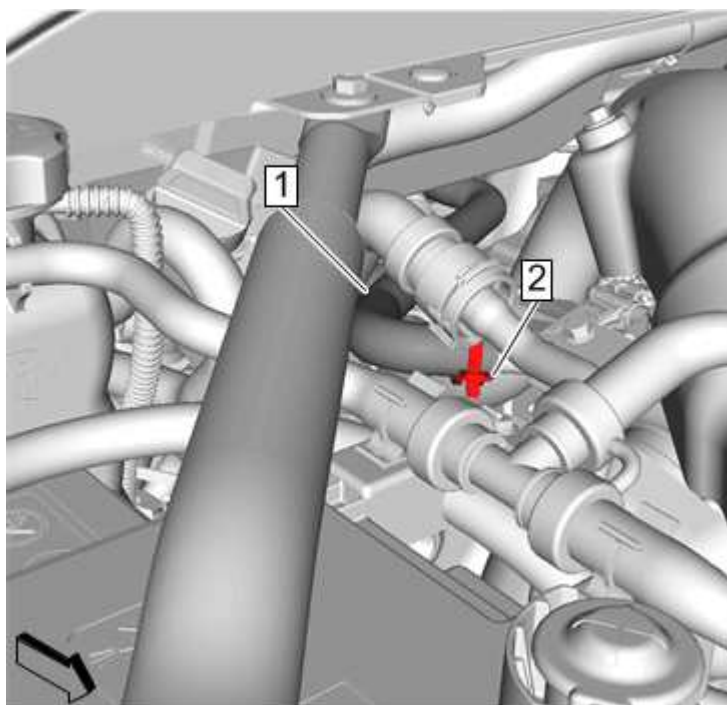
Heater Inlet Hose And Exhaust Gas Recirculation Cooler Bypass Valve
